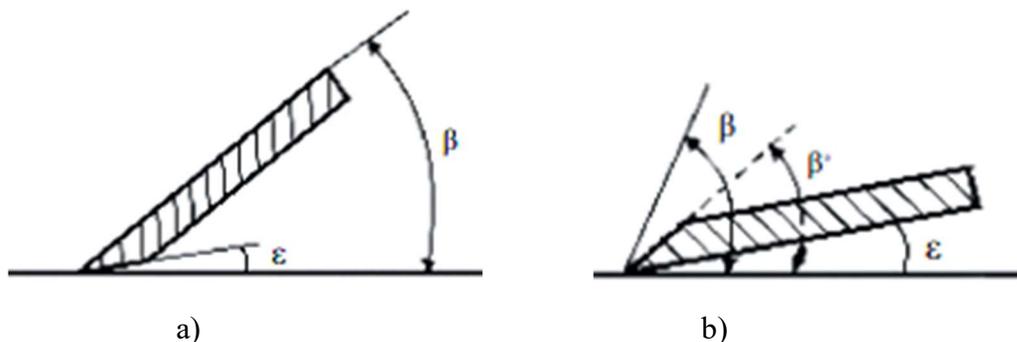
Section of dihedral wedge: *a* – with lower grinding; *b* – with upper grinding
